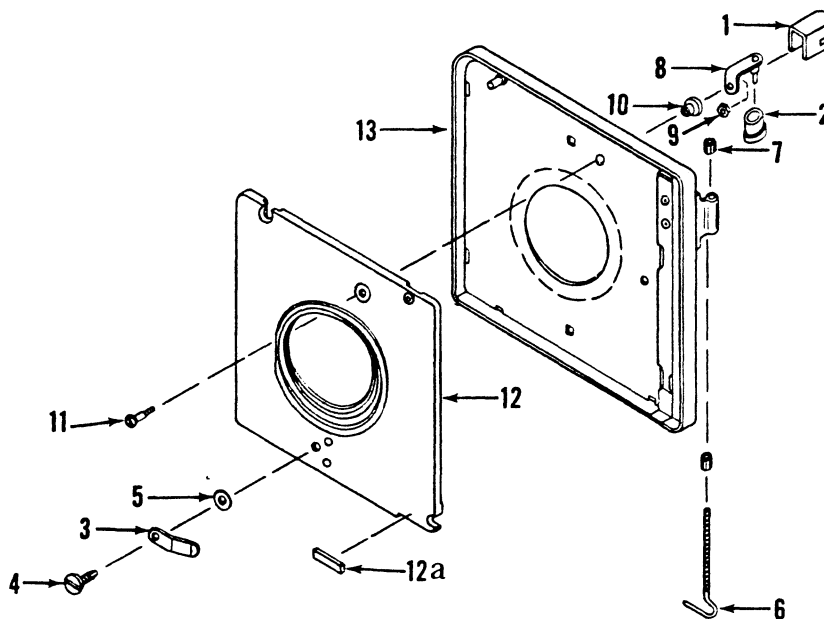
LENSBOARD COMPLETE FOR #1 SYNCHRO-COMPUR SHUTTER
